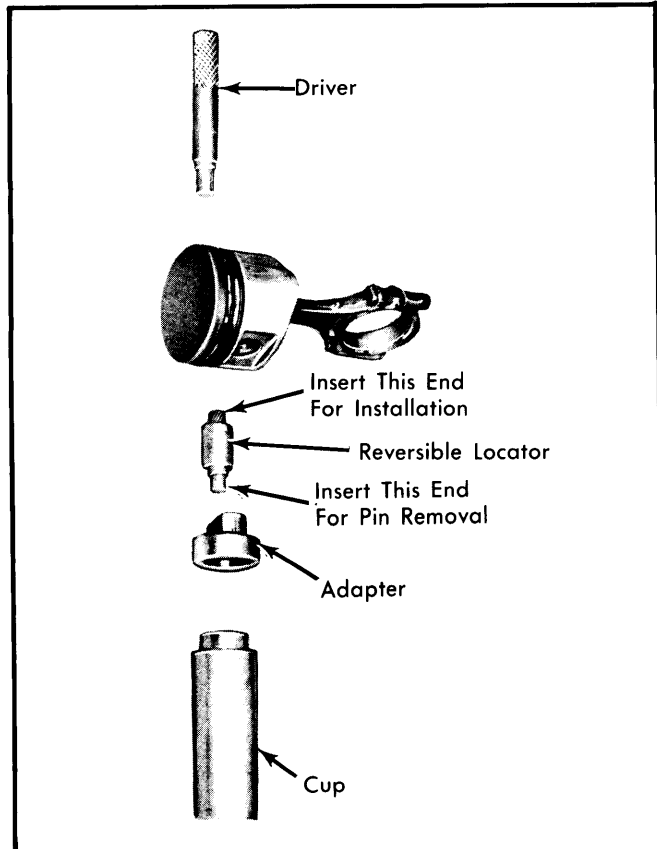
Tool Set Up for Piston Pin Removal and Installation
